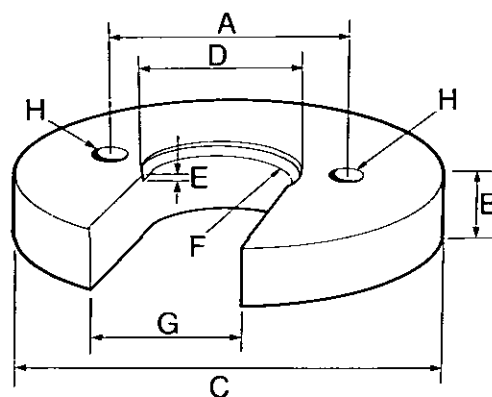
MODIFICATIONS TO BRAKE DRUM REMOVAL TOOL
